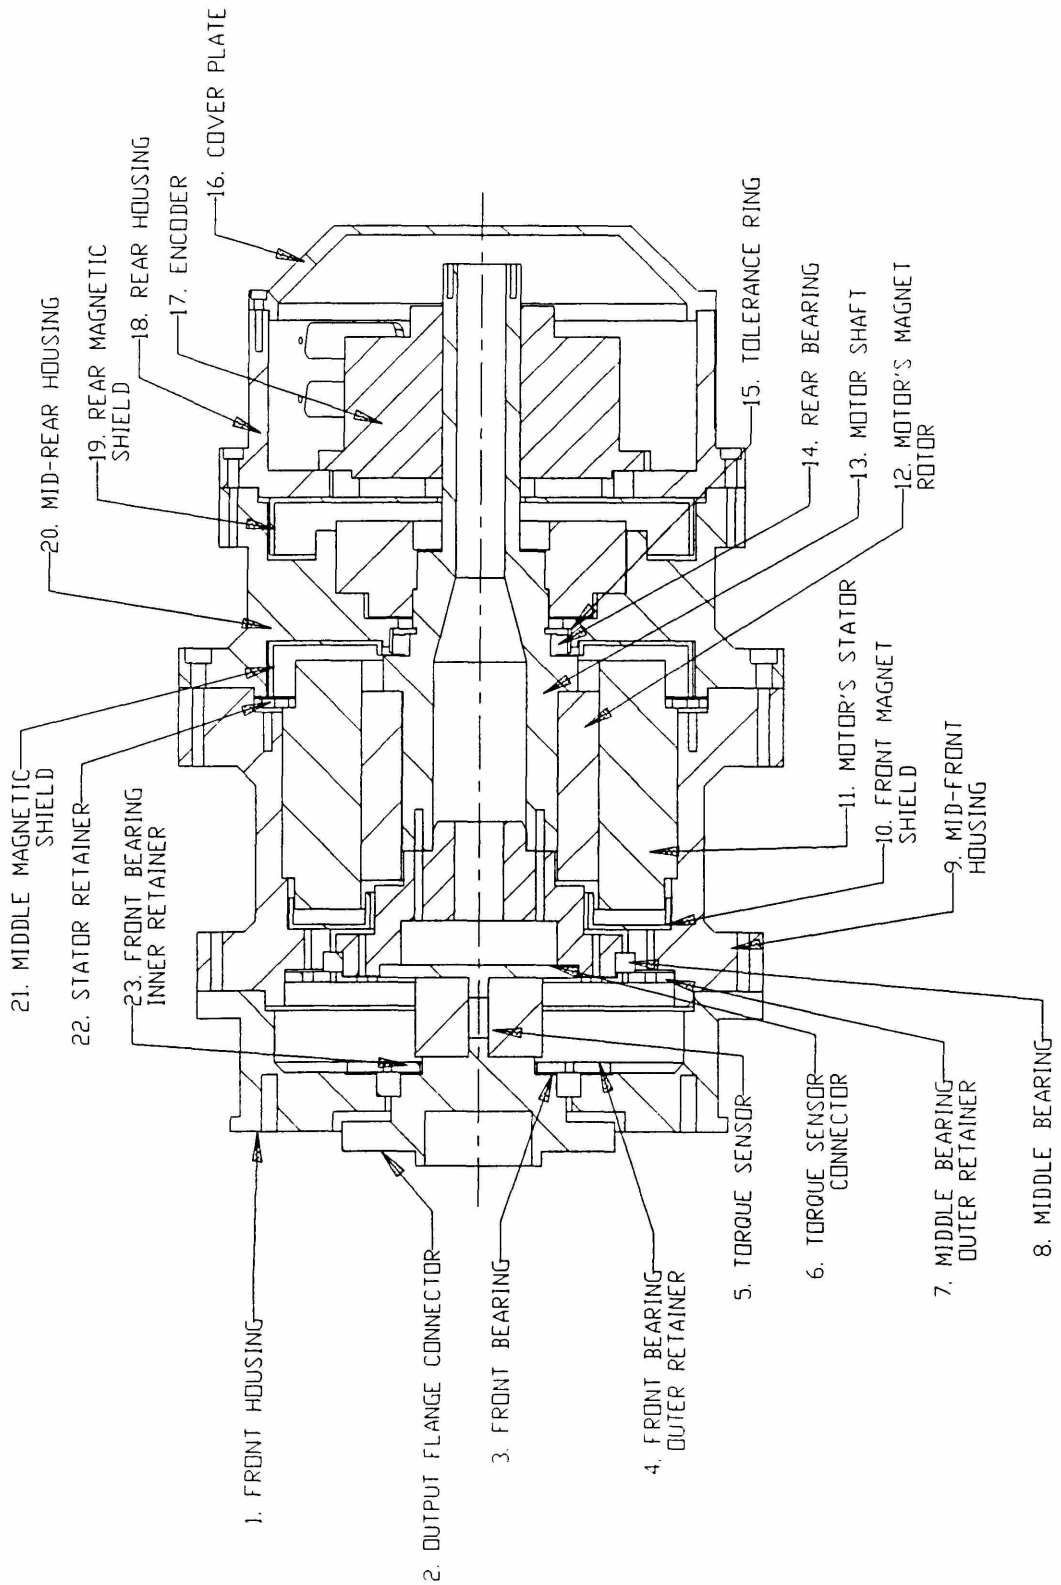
Cross-Sectional View of Actuator Package (Beta-Prototype)
